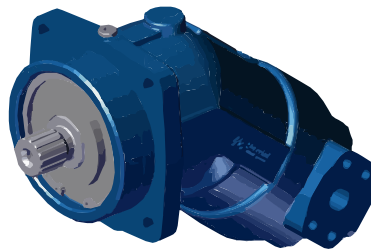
3D CAD drawing of a pump produced and assembled by Brevini Fluid Power (Power, B. 2016).
